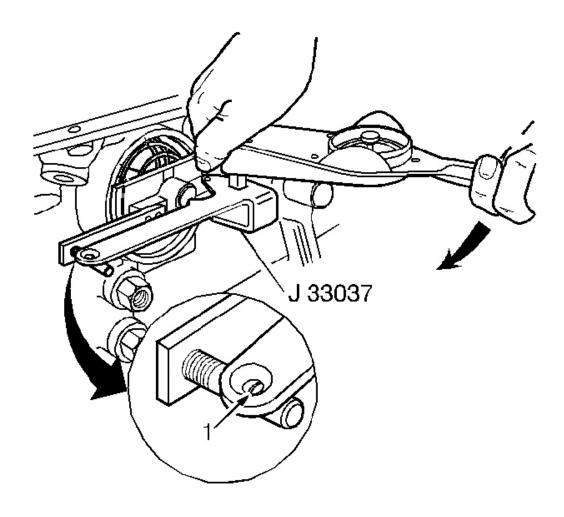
Identifying Gage Slot Courtesy of GENERAL MOTORS CORP.
